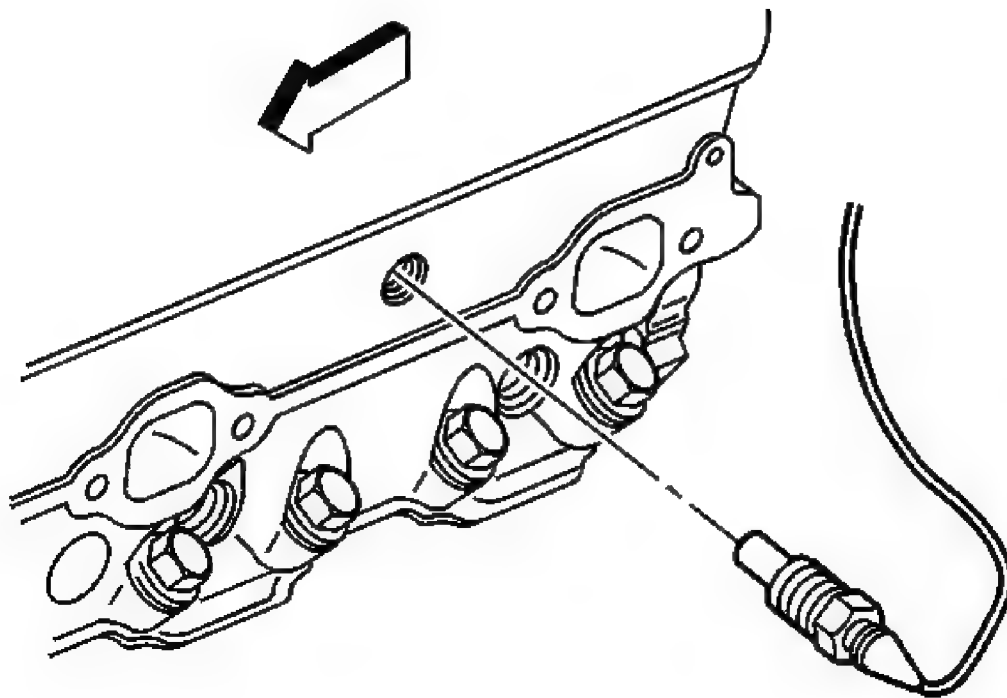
View Of Engine Coolant Temperature Gage Sensor
